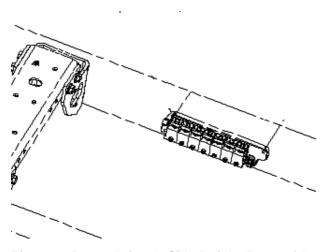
On Driver's Side Rail In Front Of Rear Cab Cross Member (4-Pack And First 7-Pack Are Mounted Here)
